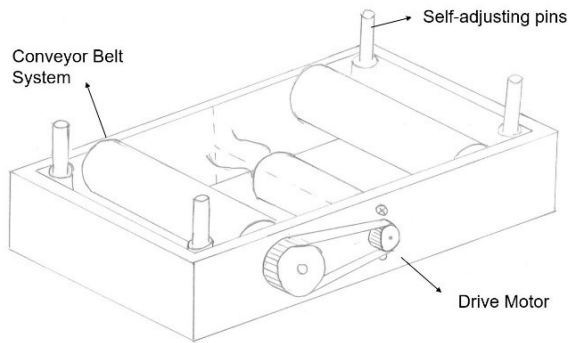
Lower housing containing a drive motor and the lower conveyor belt system
